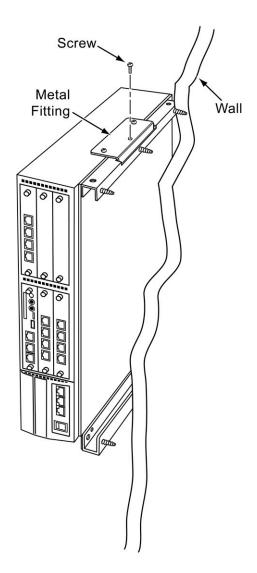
Secure Metal Fitting to Upper Wall Mount Bracket with a Screw
